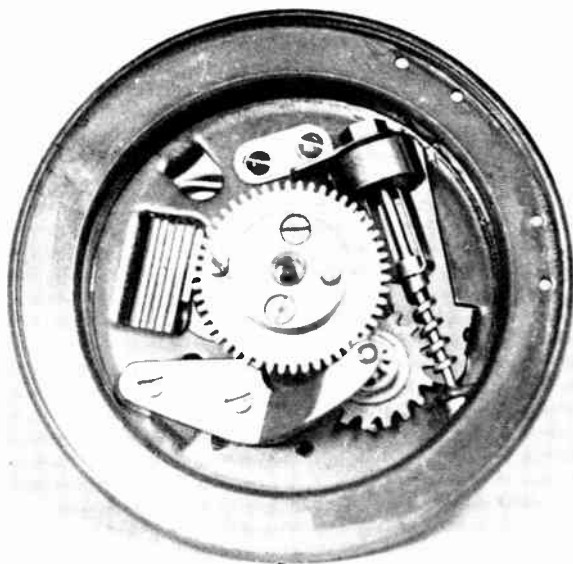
THE TOP OF THE DIAL SHOWN IN FIG. 13. With the number and finger plates removed to show the governing mechanism.
